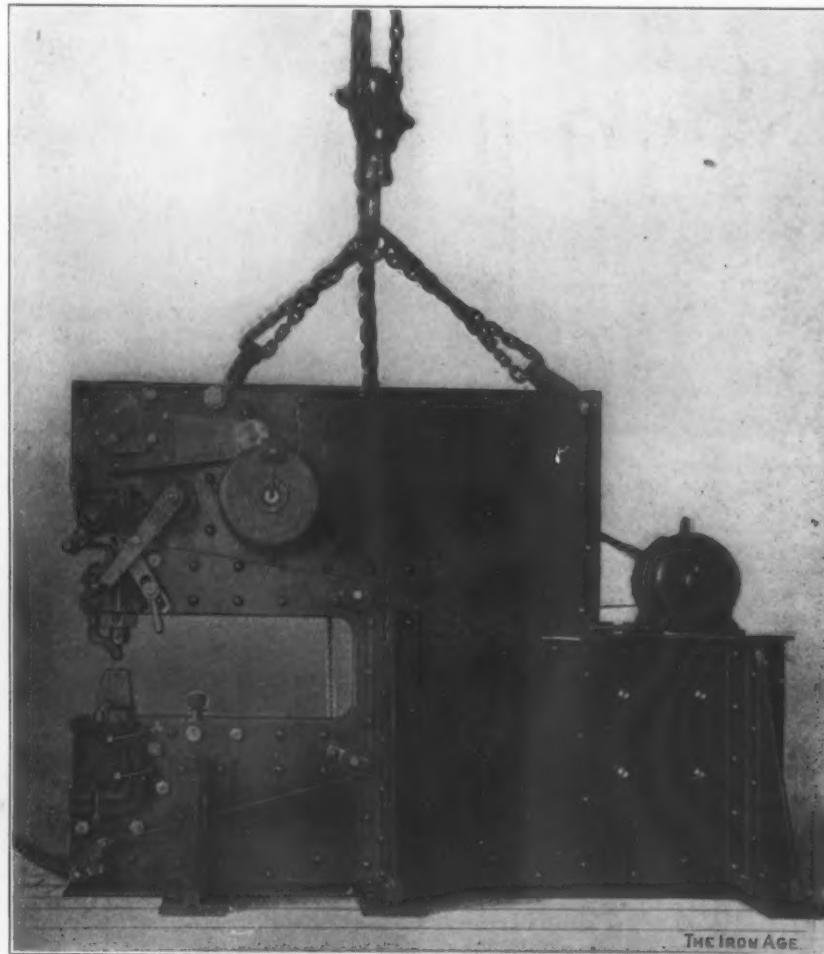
Johns Motor Driven Portable Punch, Built by Henry Pels & Co., New York.
